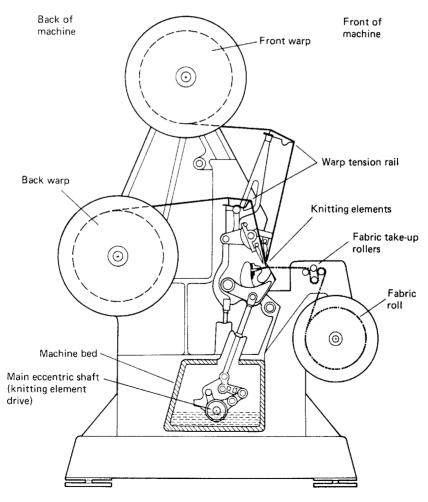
Cross-section of a bearded needle tricot machine.
